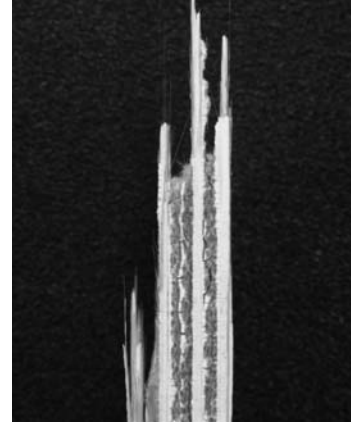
Tensile Fracture Surface of N610/Alumina at 1200°C (Side)
